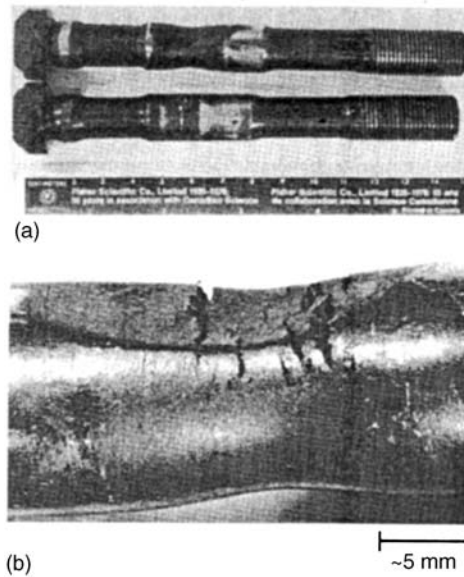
Failure of a connecting rod bolt in a diesel engine. In (a), the failed bolt is the upper one, having necked down in a nominally larger cross-sectional area. The lower bolt is another removed from the engine in unstretched condition. In (b), the stretched region of the bolt is shown, with cracks that have opened up during bolt tensioning and subsequent operation. (Reprinted with permission from ASM International. All rights reserved www.asminternational.org)
